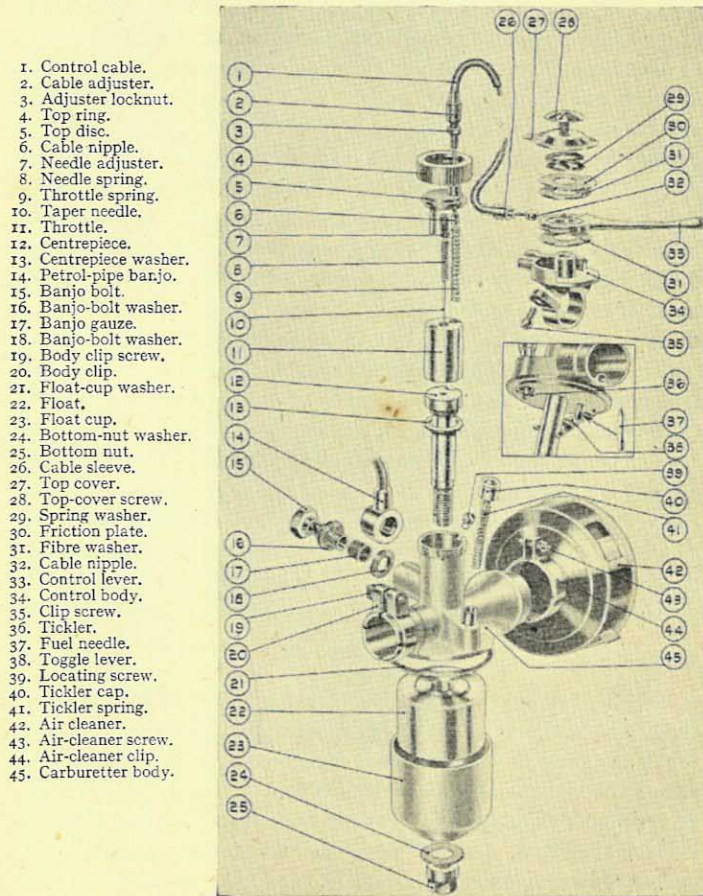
TYPE 6/O CARBURETTOR MARK 1F.
